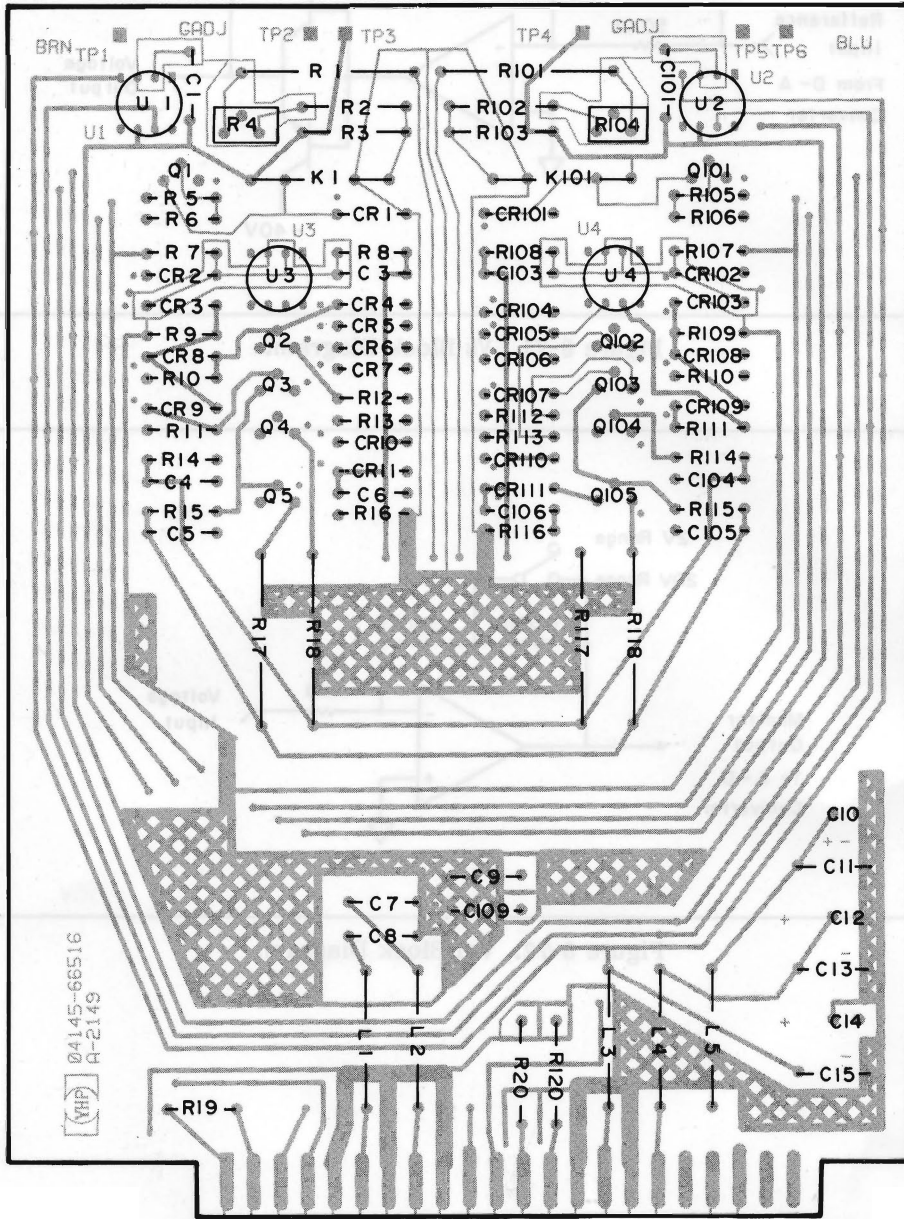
A16 Vs/Vm Board Assembly Component Locations.
